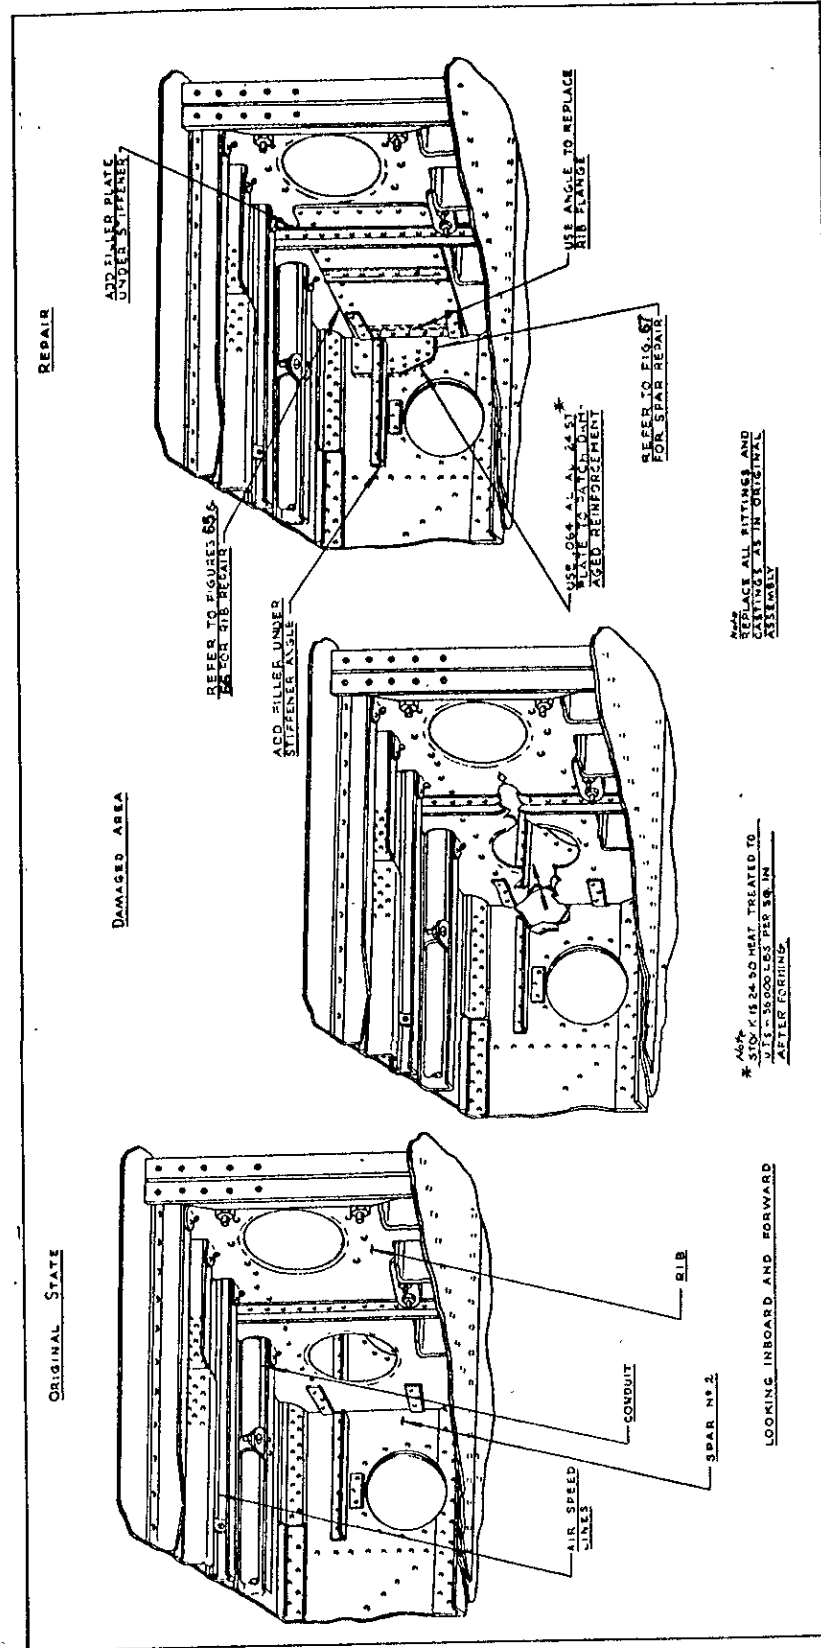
Wing - Rib and Spar No. 2 Sta No. 81-1/2
